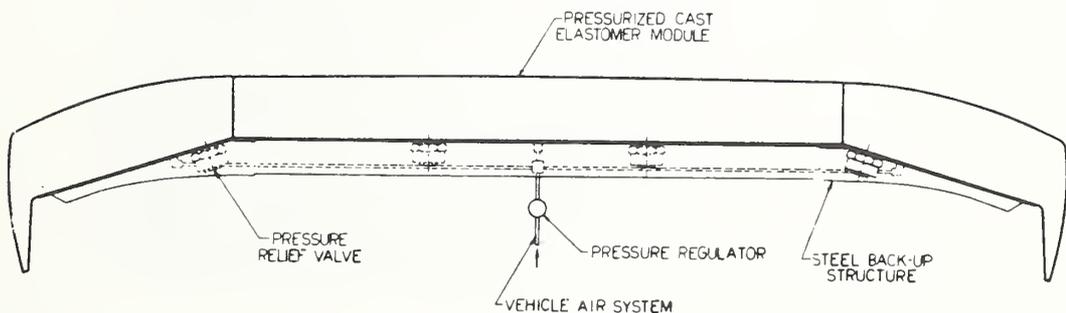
FIRESTONE HELP BUMPER — PNEUMATIC SYSTEM
